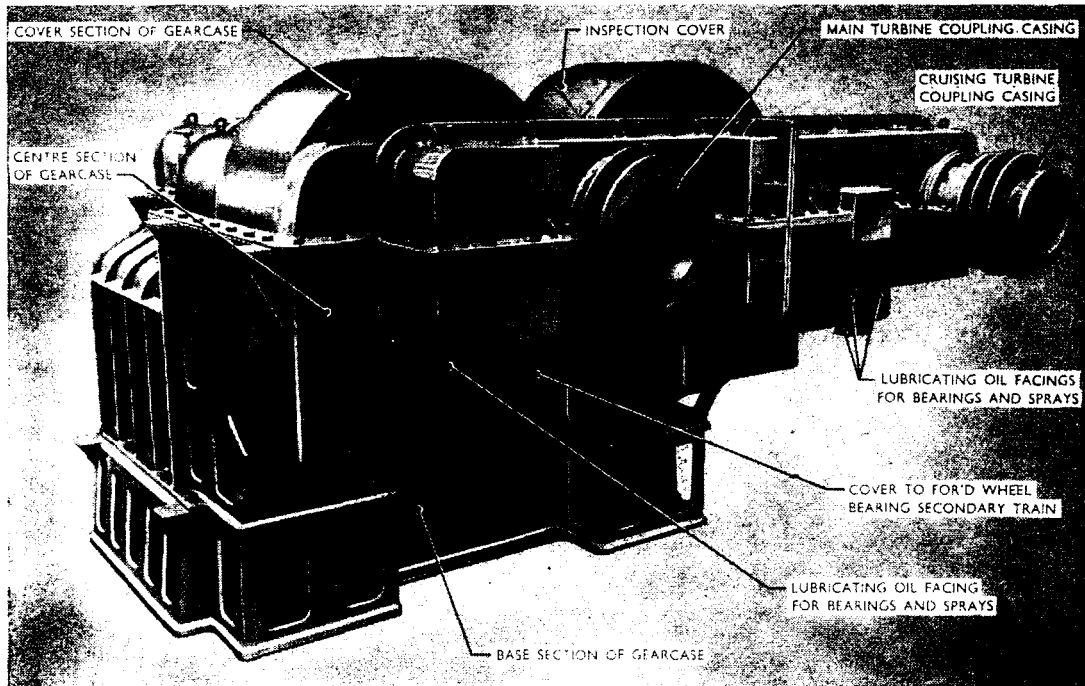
Y.100 GEARCASE—VIEW FROM FORWARD END
